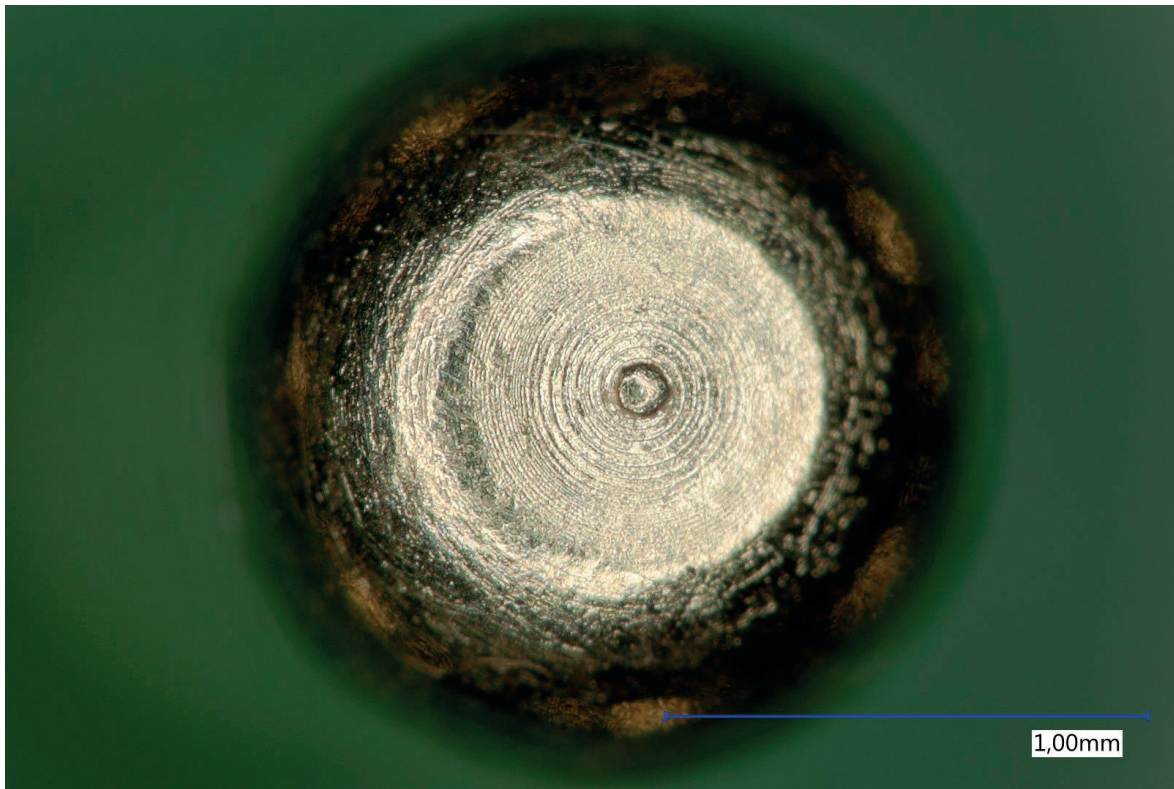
Close-up of the tip of one of the FADEC B socket pins of figure 11. (Source: Technify Motors)
